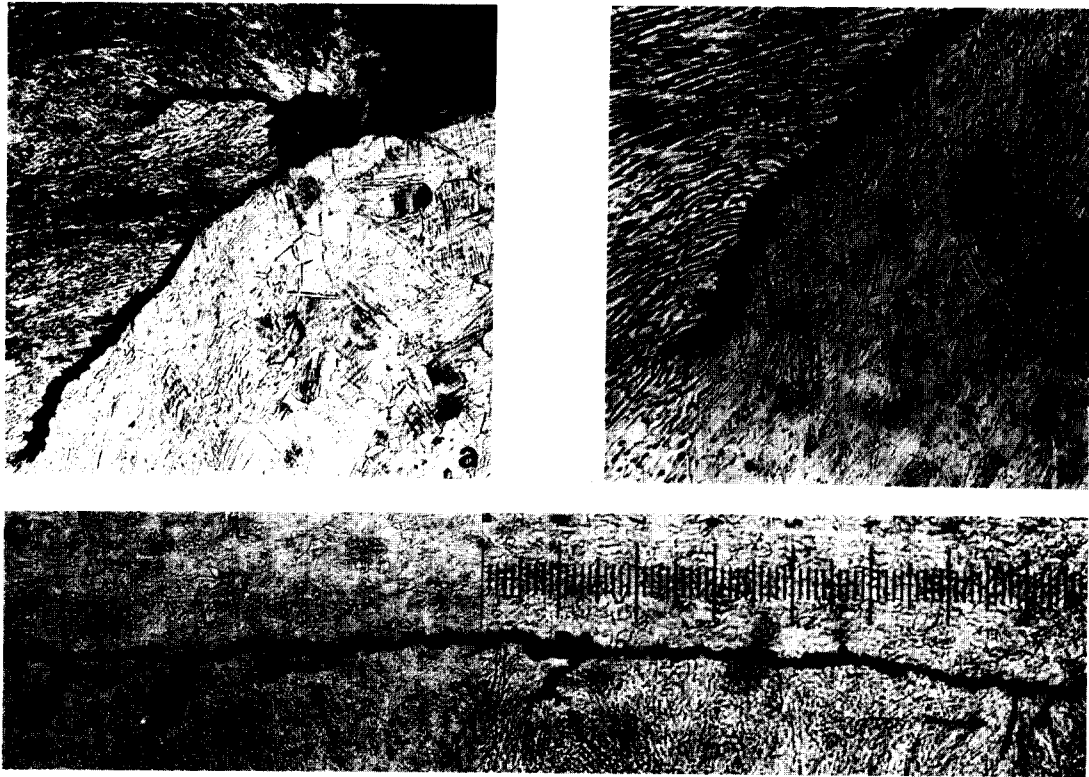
Microstures of E6B(N) : a) weld root area showing lack of fusion, X100, b) higher magnification from the same area, X200, c) top view of the lack of fusion and notch at the weld root, X50
